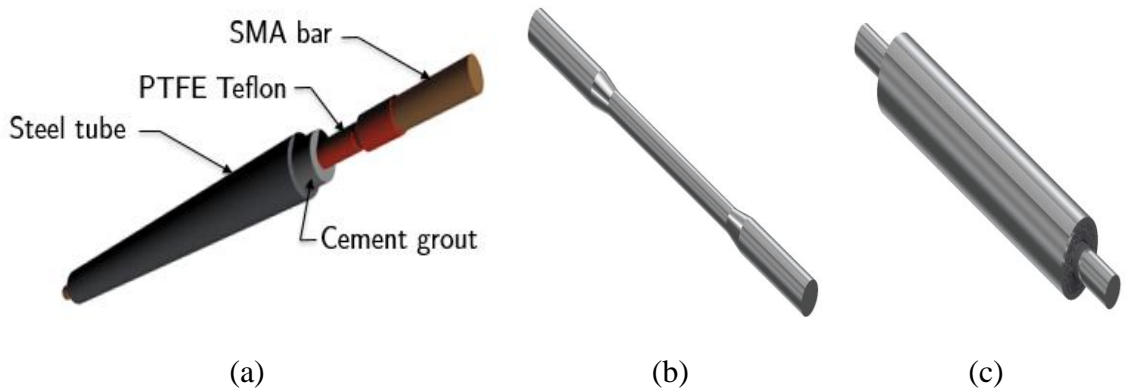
Proposed CSD: (a) component parts; (b) machined NiTi SMA bar; (c) assembled view
